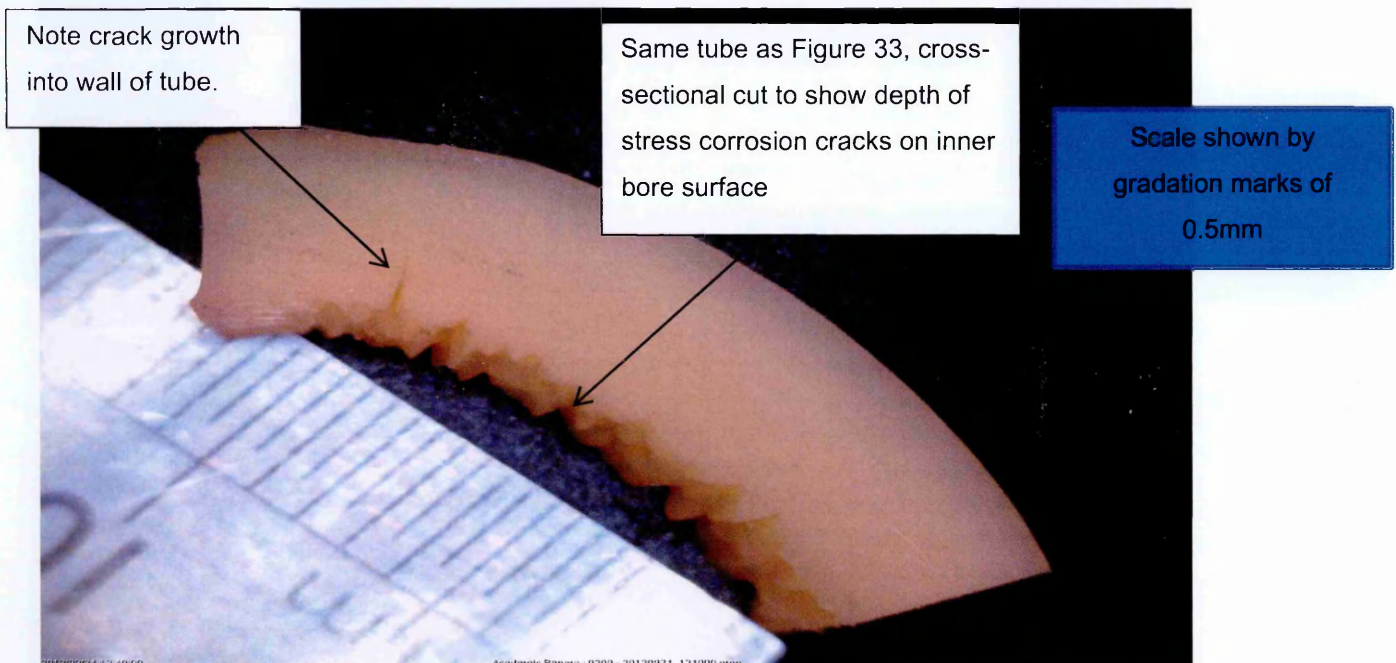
Stress Corrosion Damage for an EPDM/PP blend tube
